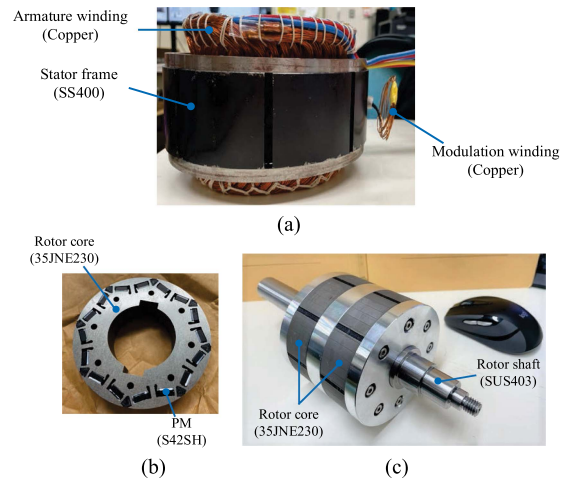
Photographs of prototype motor. (a) Stator. (b) Rotor core. (c) Rotor.
